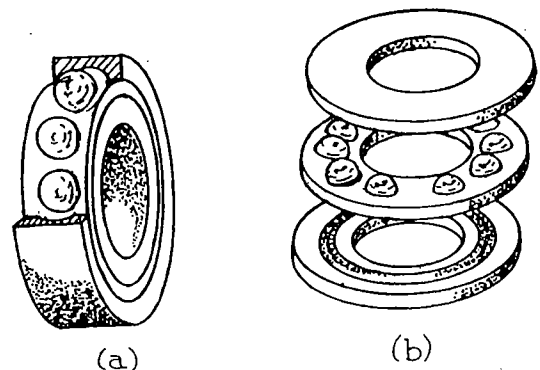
Ball bearings: (a) a radial ball bearing; (b) a thrust ball bearing.
